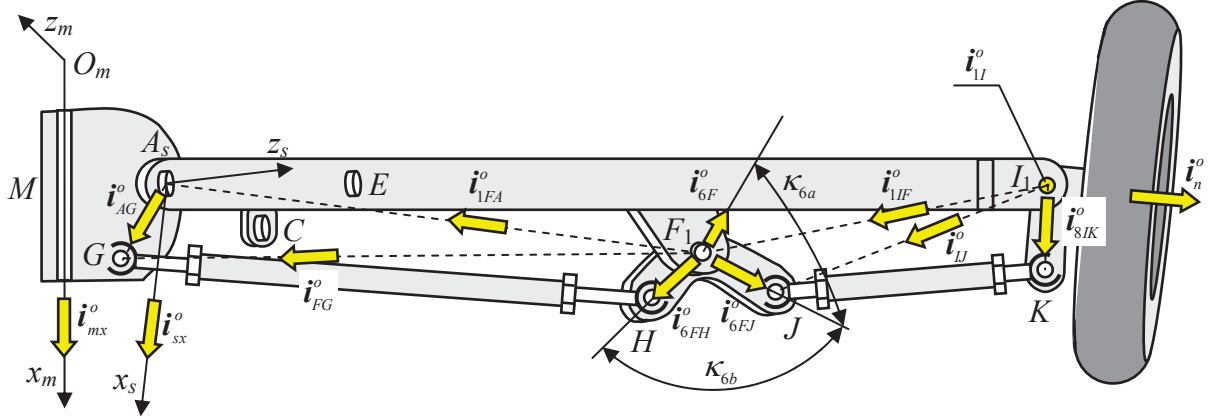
The chassis mechanism that causes rotation of the steering wheel
